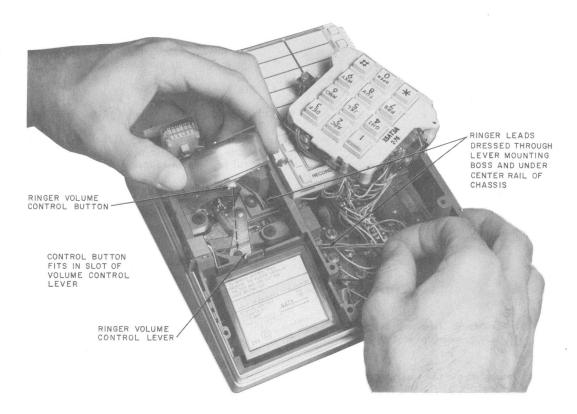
Ringer Being Installed in 2960A01M Chassis With Dial Rotated onto Memory and Shield Removed
